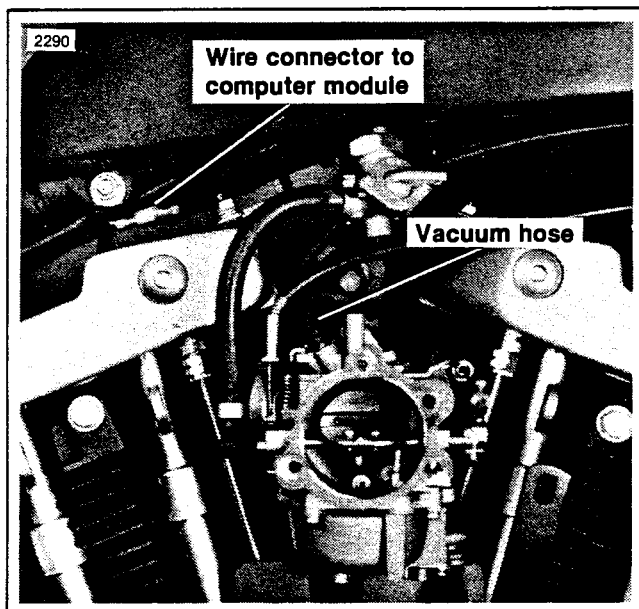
V.O.E.S. Wire Connector and Vacuum Hose
